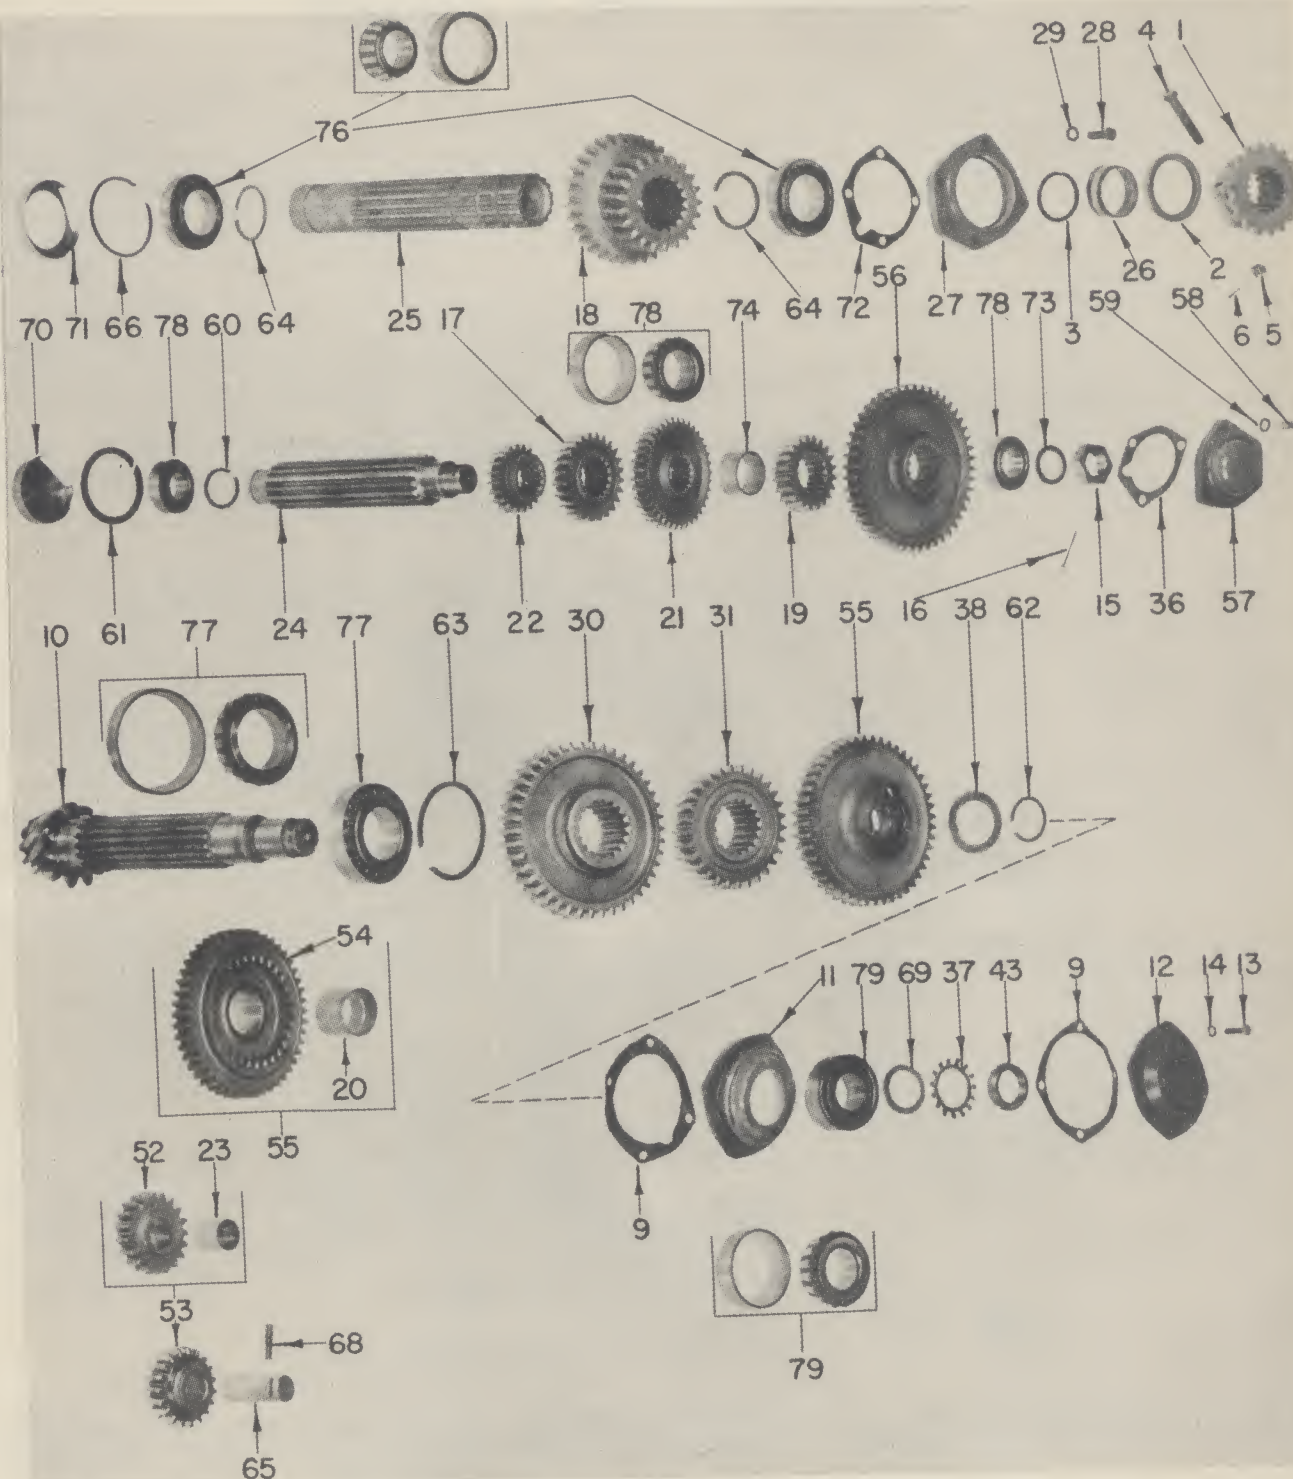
Components of 6 speed transmission with adjustable bearings for all shafts except reverse idler.
